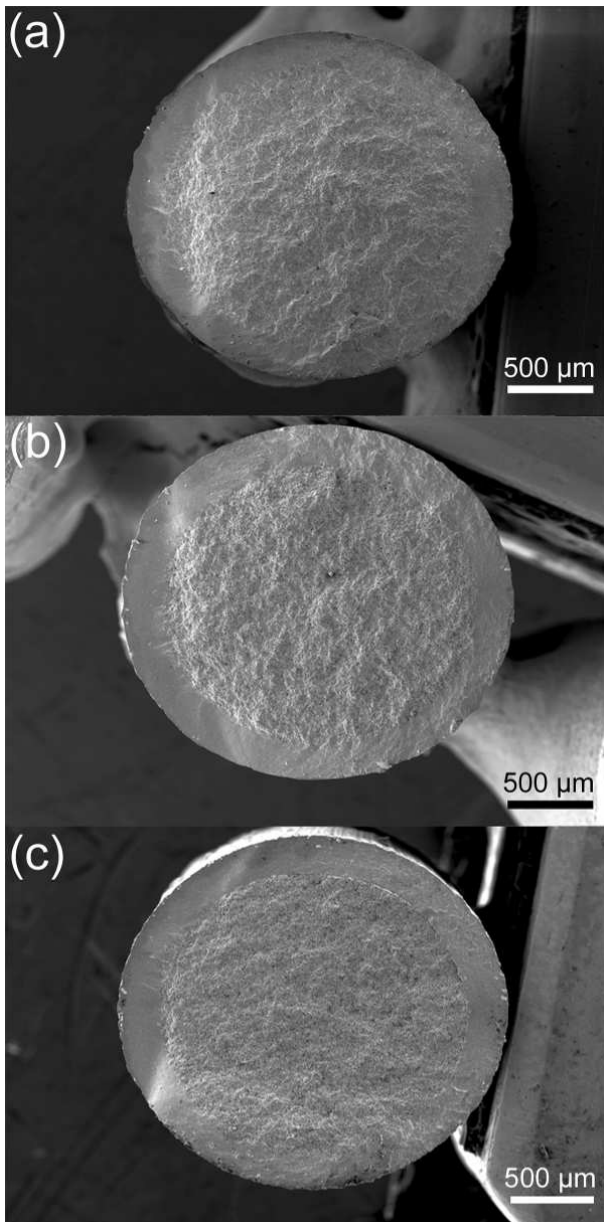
The cross sections (fracture surfaces) of: a) ZST20-Z50 1.0, b) ZST30-Z50 1.0 and c) ZST40-Z50 1.0 defect-free core-shell rods after sintering
